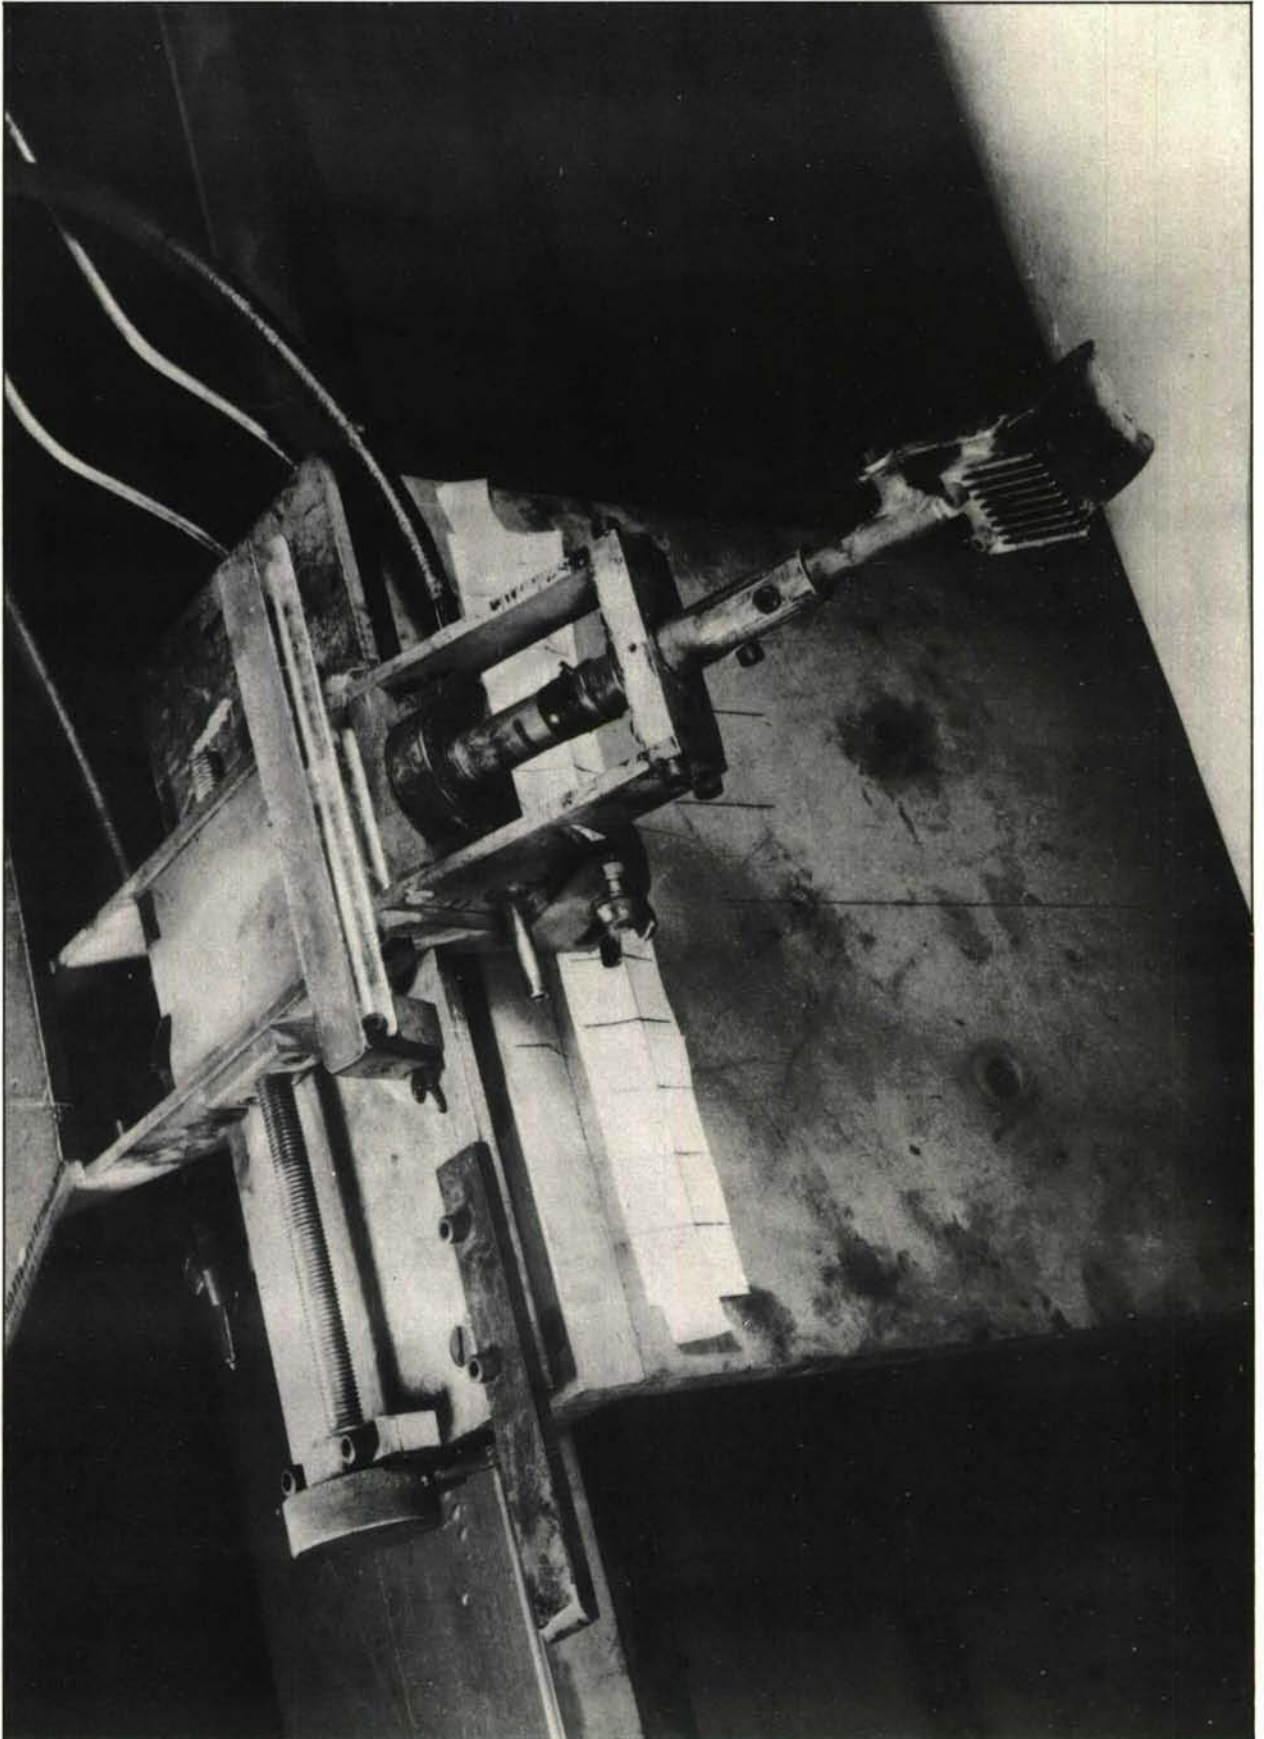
COMB AND TONGUE OF KELLOGG TUBE WINDING MACHINE
